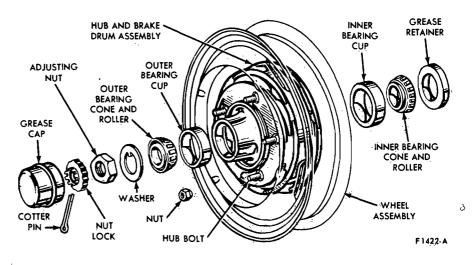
Front Hub, Bearing and Grease Retainer Drum Brakes
